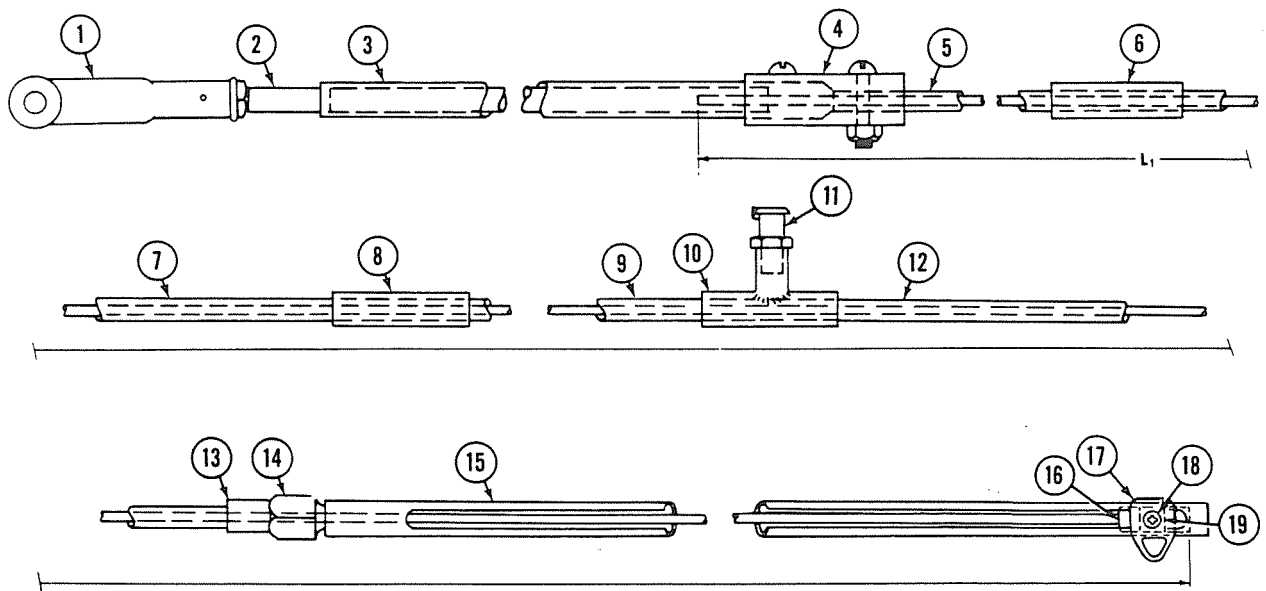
(Sheet 2 of 2 Sheets). Wing Flap Control System – Strut Assembly, Cable Chart, and Cable Assembly
